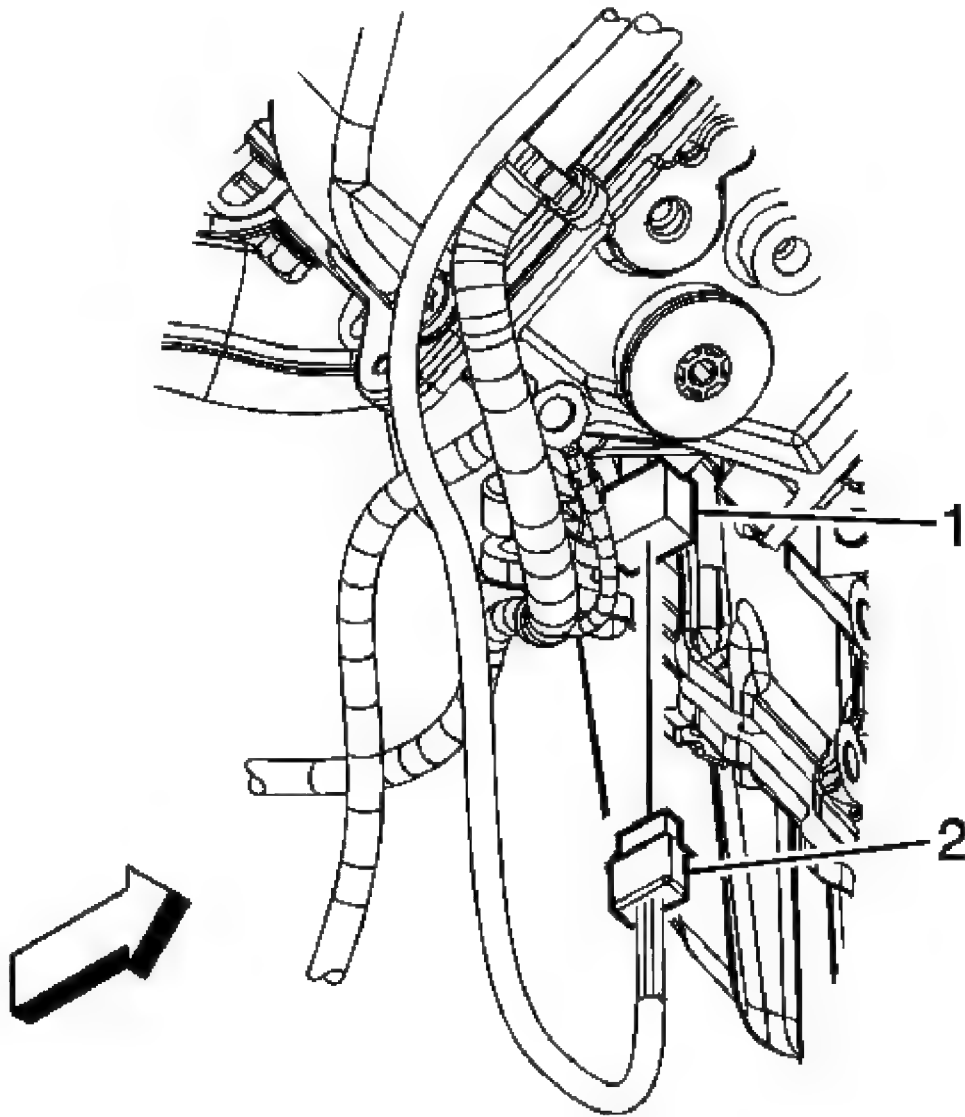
Identifying Right Coolant Heater Electrical Connector
